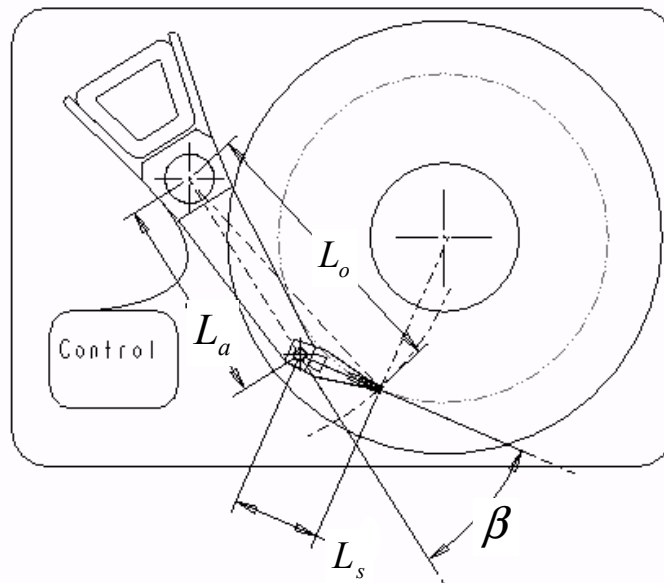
Magnetic disk drive actuator assembly with small skew.
